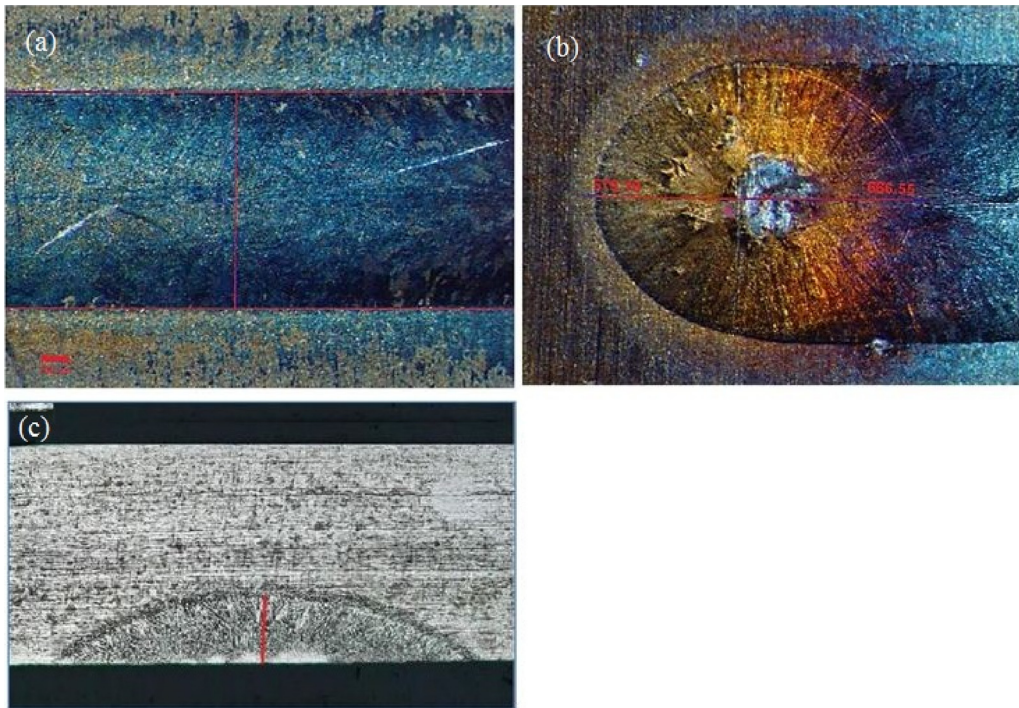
Weld bead geometry measuring; (a) The weld width, (b) The front and rear length of the semi-ellipsoids, (c) Weld penetration depth.
